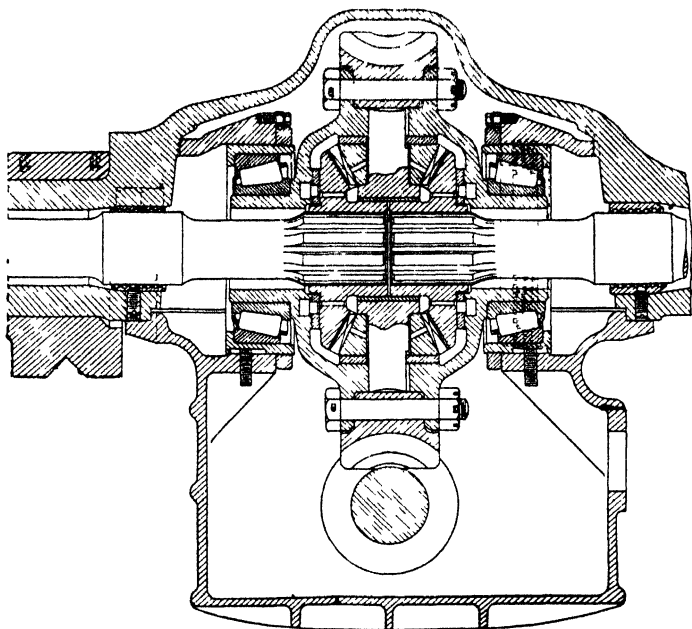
GUY BUS-DRIVE WORM GEAR, SECTION ON GEAR AXIS
